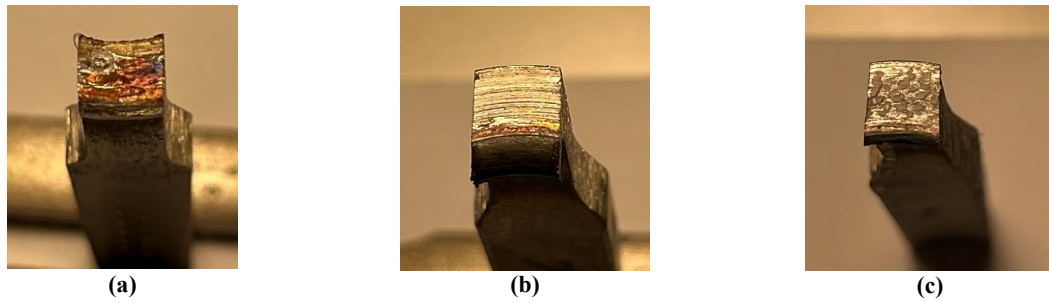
Fracture surface of the welded samples: a) Sample no. 1, b) Sample no. 3, c) Sample no.9
